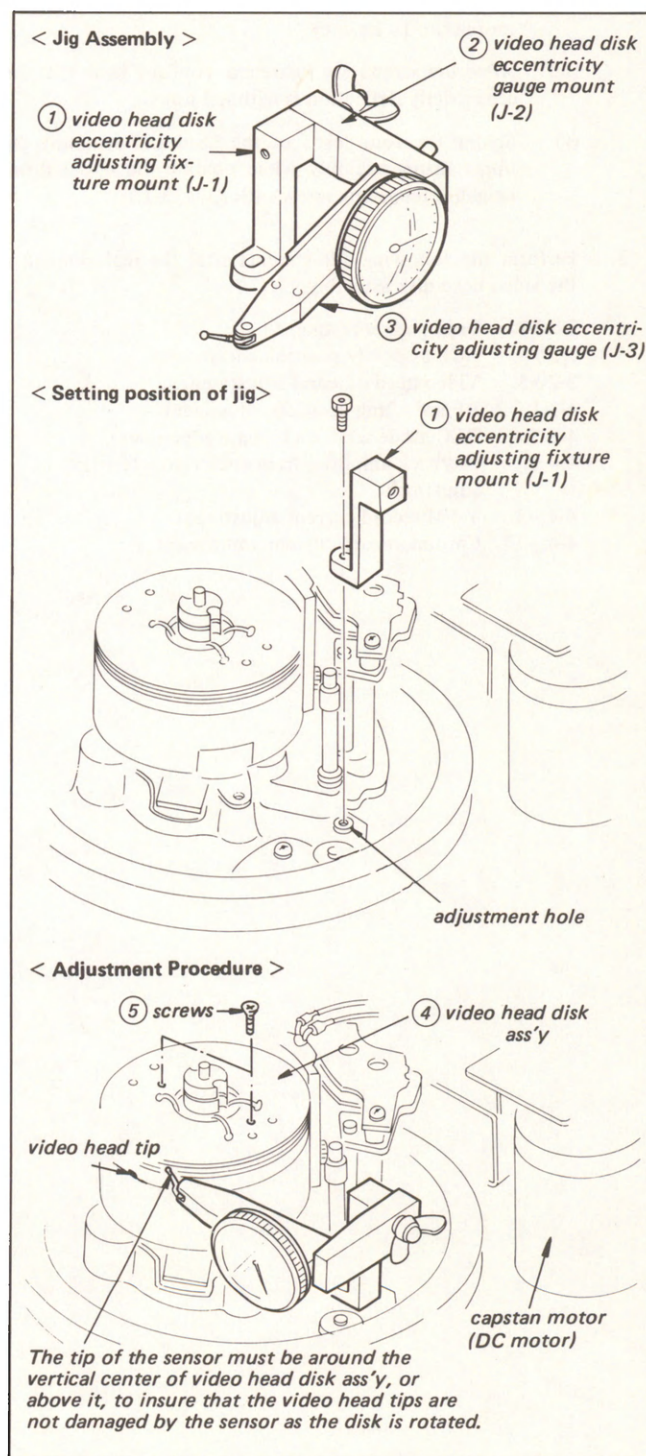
Eccentricity adjustment of the video head disk assembly
